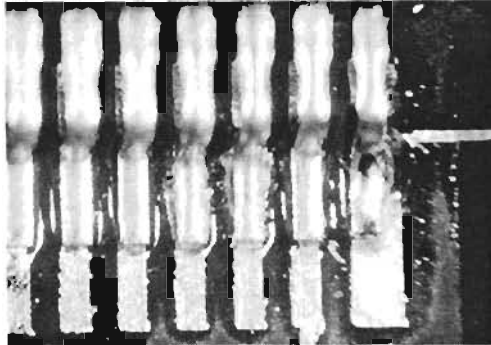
Solder wicking along terminals of surface mounted component (EPS)
